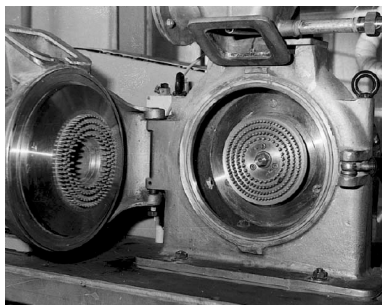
Grinding zone of pin mill in the cryo-grinding process.
